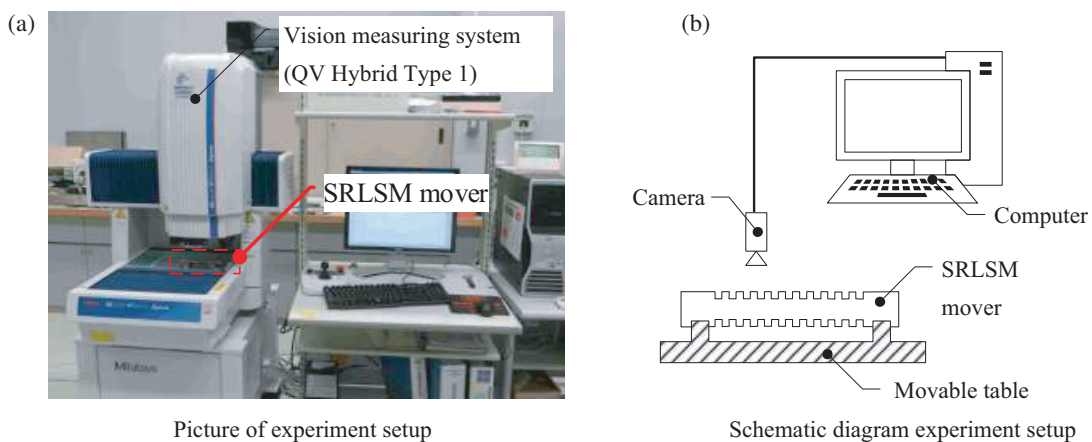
Experiment setup for the SRLSM's shaft mover dimension measurement.
